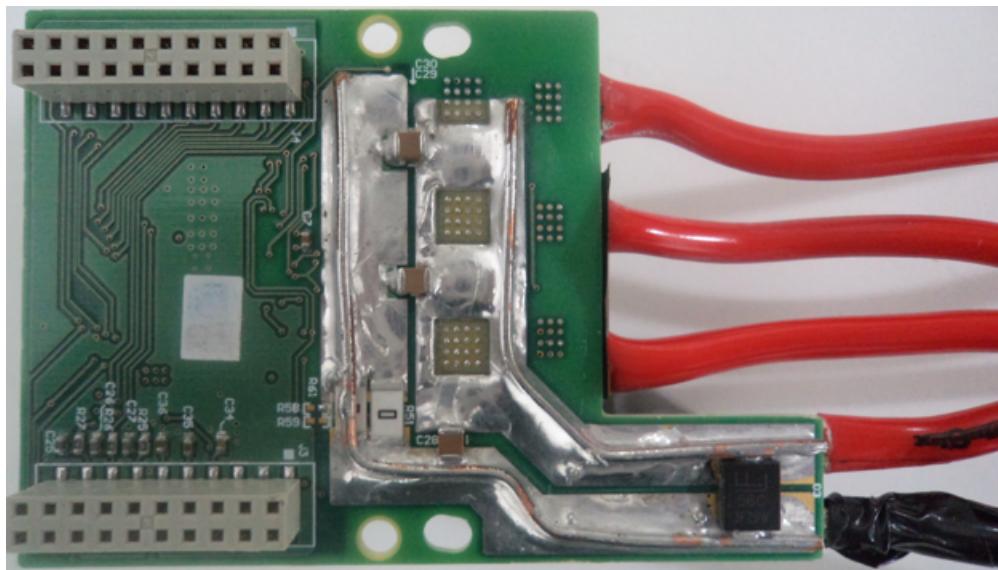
Assembled Power Stage With Power Connections — Bottom View
